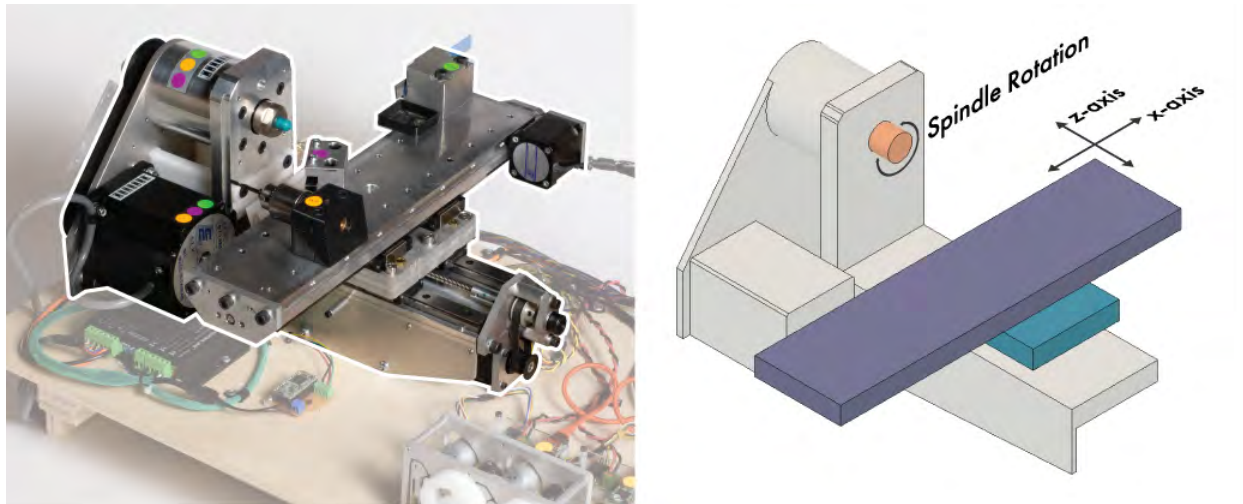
Left: The lathe is highlighted in a white outline to distinguish it from the background. Geometries to be cut are mounted to the spindle using a collet, which is currently holding a blue workpiece. Right: schematic view of the lathe. Rotating spindle in orange, x-axis in purple, z-axis in blue.
